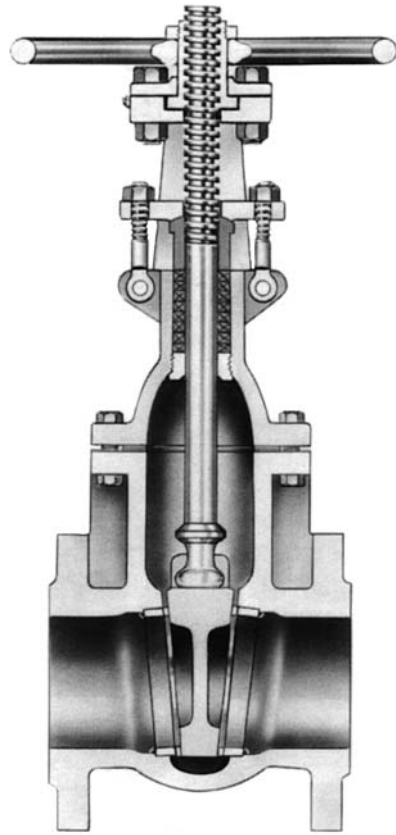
Gate valve. (Courtesy Crane Valves.)
